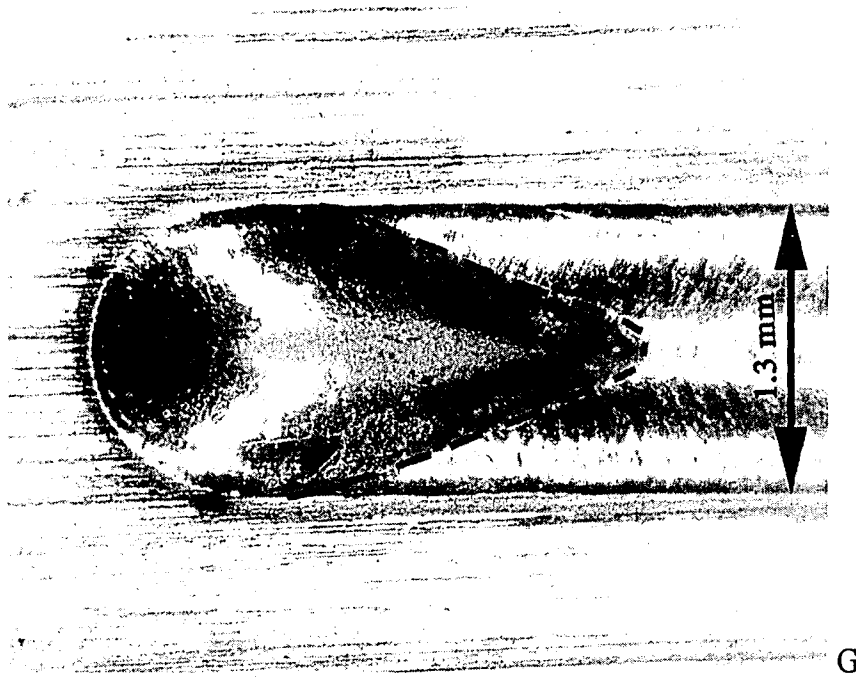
G) Weld pool shape for 67.7 mm/s travel speed laser weld illustrating teardrop weld pool shape. H) Weld pool shape for 76.2 mm/s travel speed laser weld illustrating teardrop shaped weld pool.
